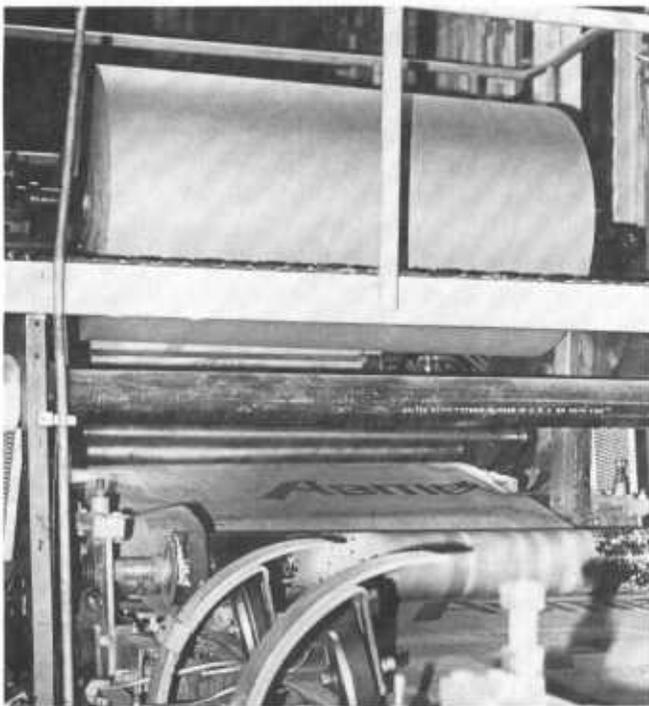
Automatic wrapping machine for finished hardboard. Rubber covered rolls in foreground fold paper around edges of each board.
